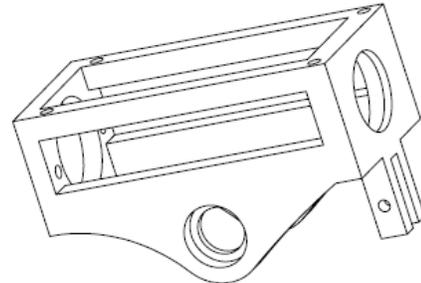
Index, Middle and Little Fingers Gearbox Body.
